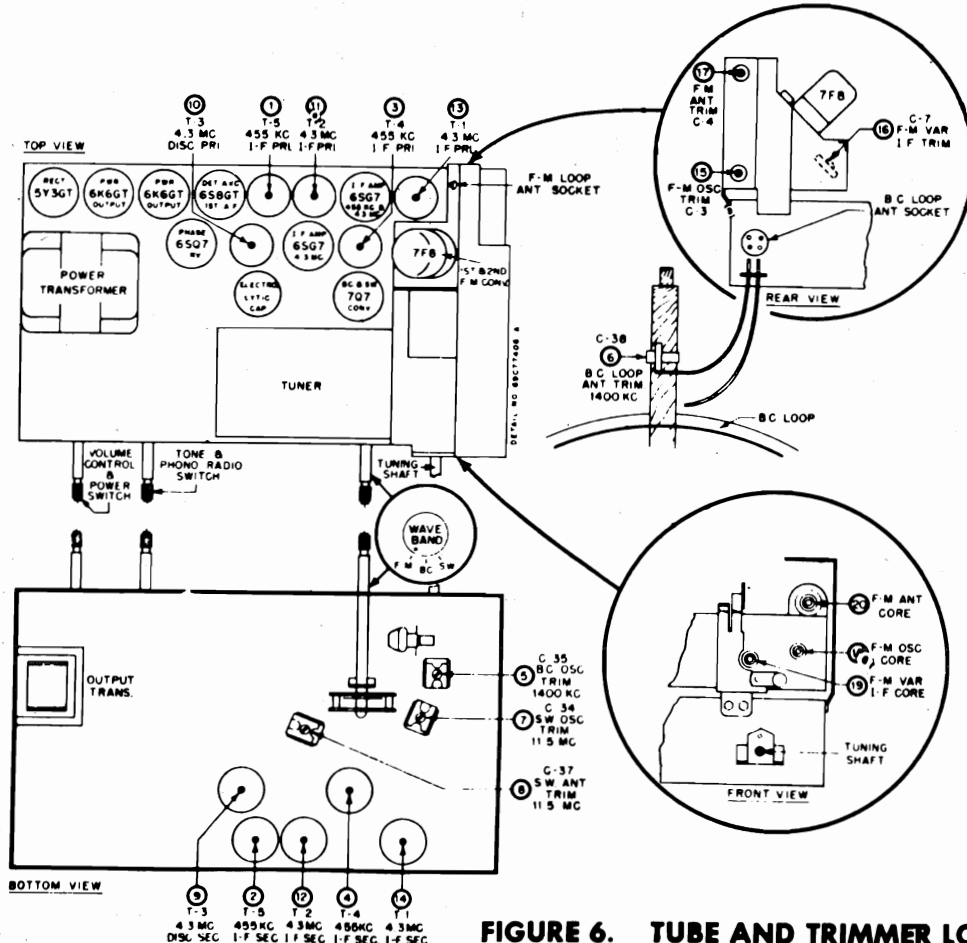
TUBE AND TRIMMER LOCATIONS
